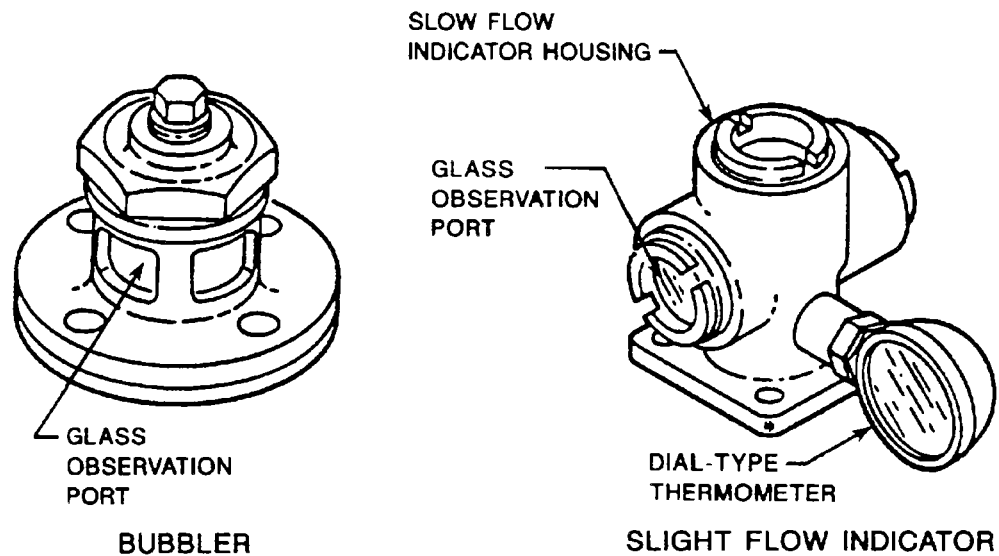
Sight Flow Indicator and Bubbler Assembly
